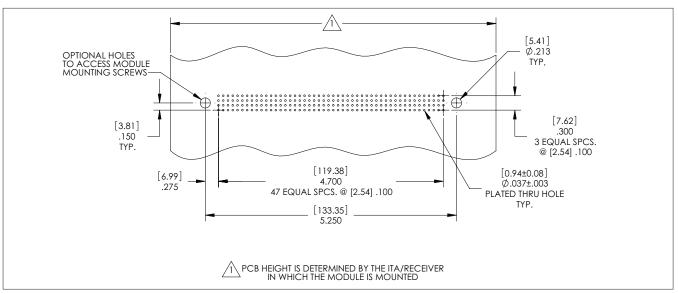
Figure C. Recommended PCB layout for modules 510150130, 510150137, and 5101511107.
